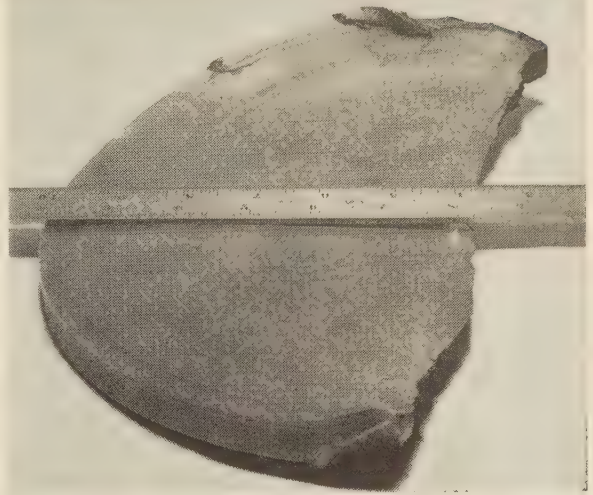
LOW-CARBON-STEEL DISK WB5, 11 IN. DIAM AFTER BURSTING AT 29,000 RPM
